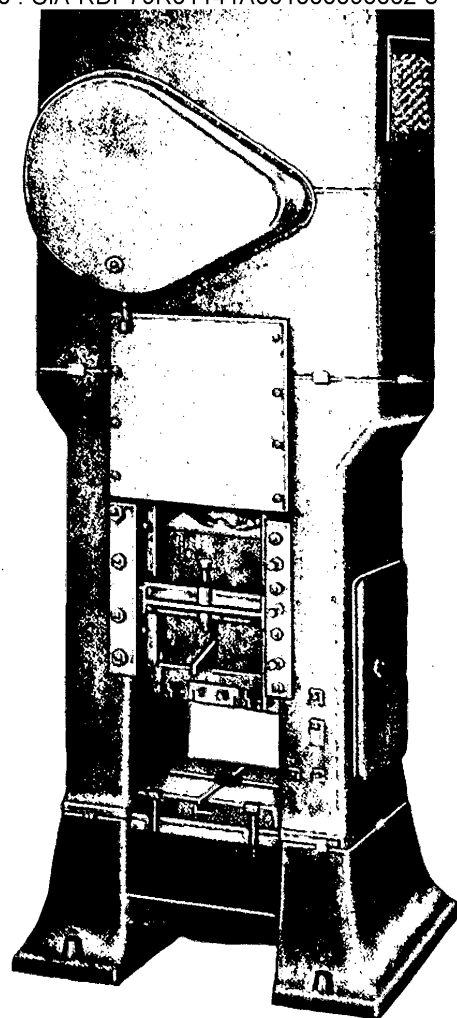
USSR: K-273 200-Ton Straight-Sided Crank Press.
